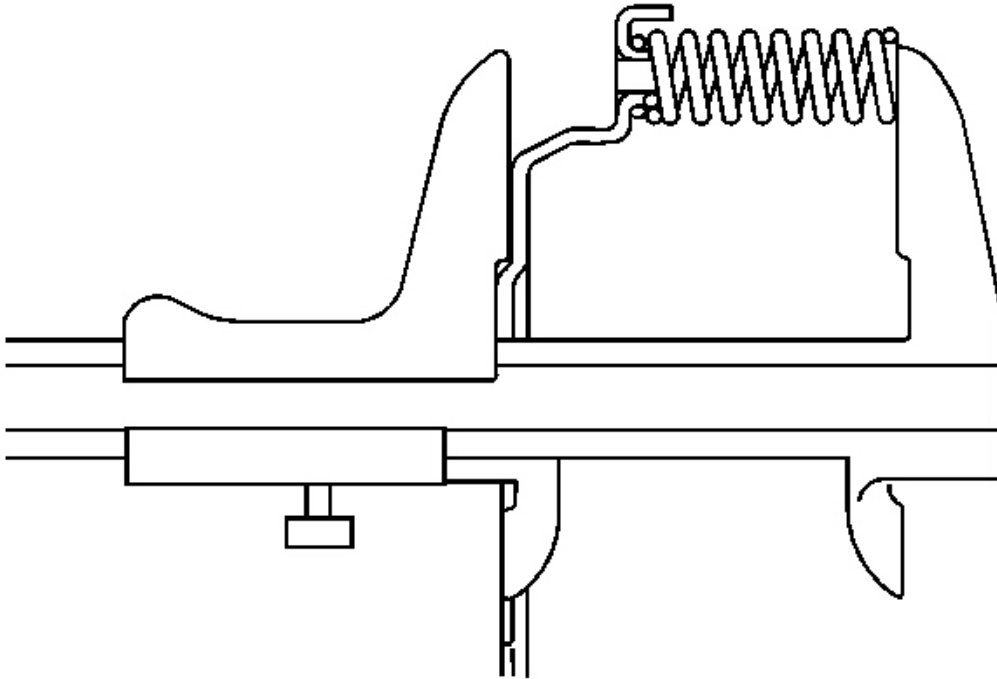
Measuring The Free Length Of Direct Clutch Return Spring Using Vernier Calipers
